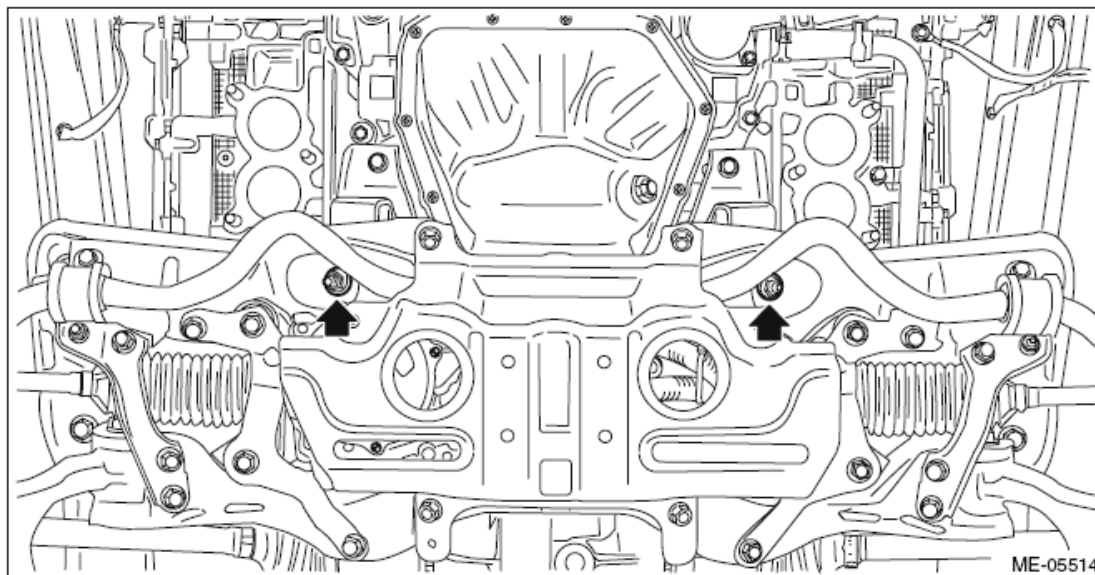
Locating Engine Mounting To Crossmember Nuts
